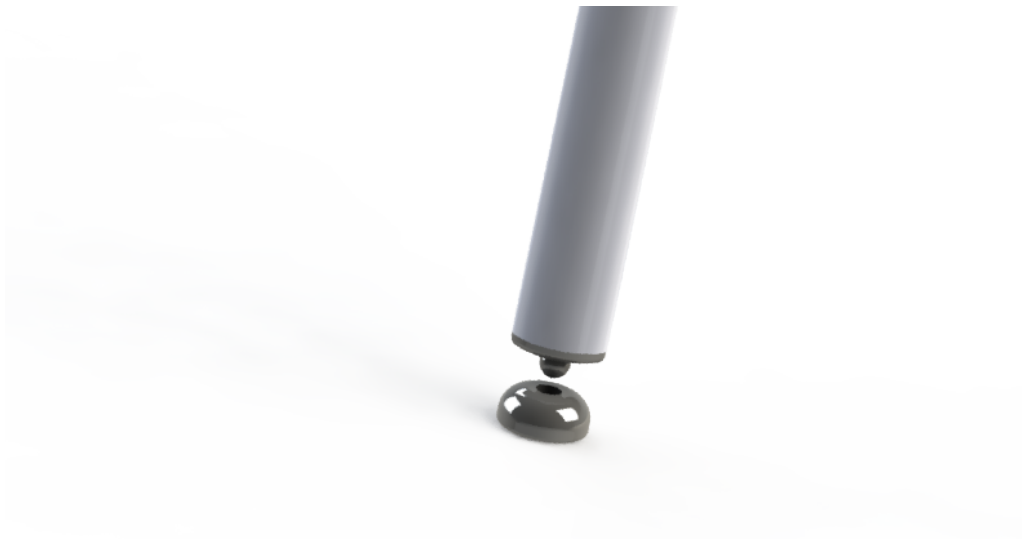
The figure shows how the feet are fastened to the legs with a ball joint. The joint enables the chair to adjust to the tilting floor.
